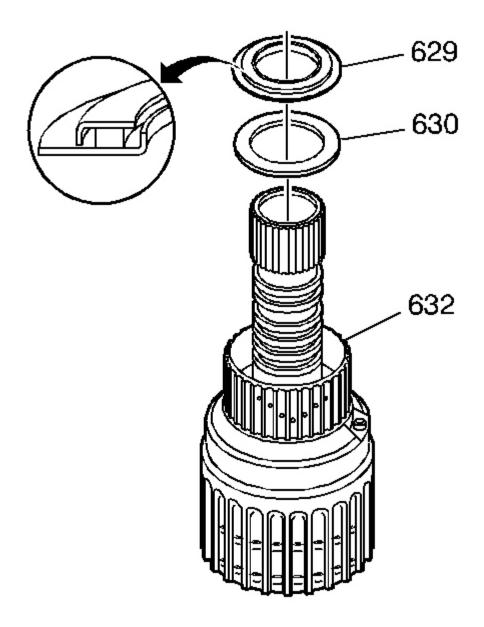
Installing Thrust Bearing Assembly & Selective Thrust Washer Courtesy of GENERAL MOTORS CORP.
